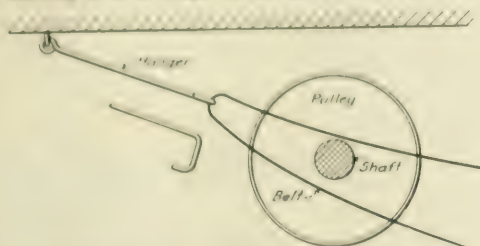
Arrangement for Hanging Idle Belt to Clear Pulley and Line Shaft.
